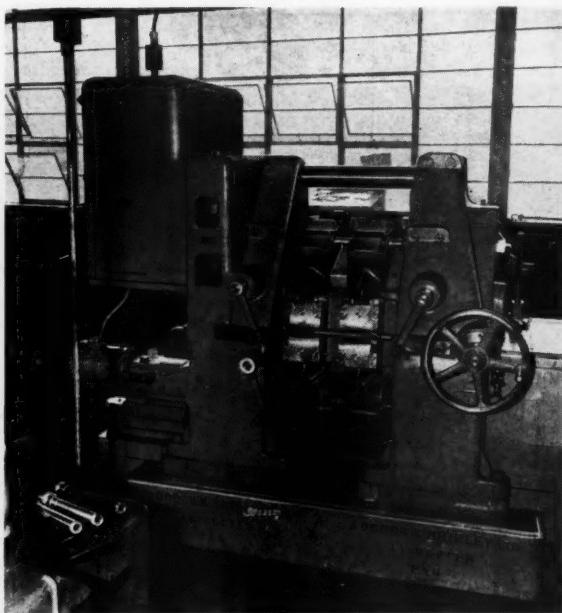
Adcock and Shipley combined milling, centring and turning machine for mainshafts
